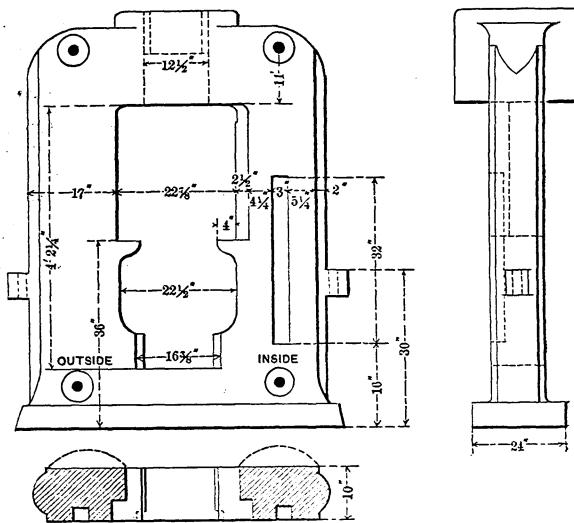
Old Style Housings, Designed 1873.—Weight, 11,000 Pounds.
